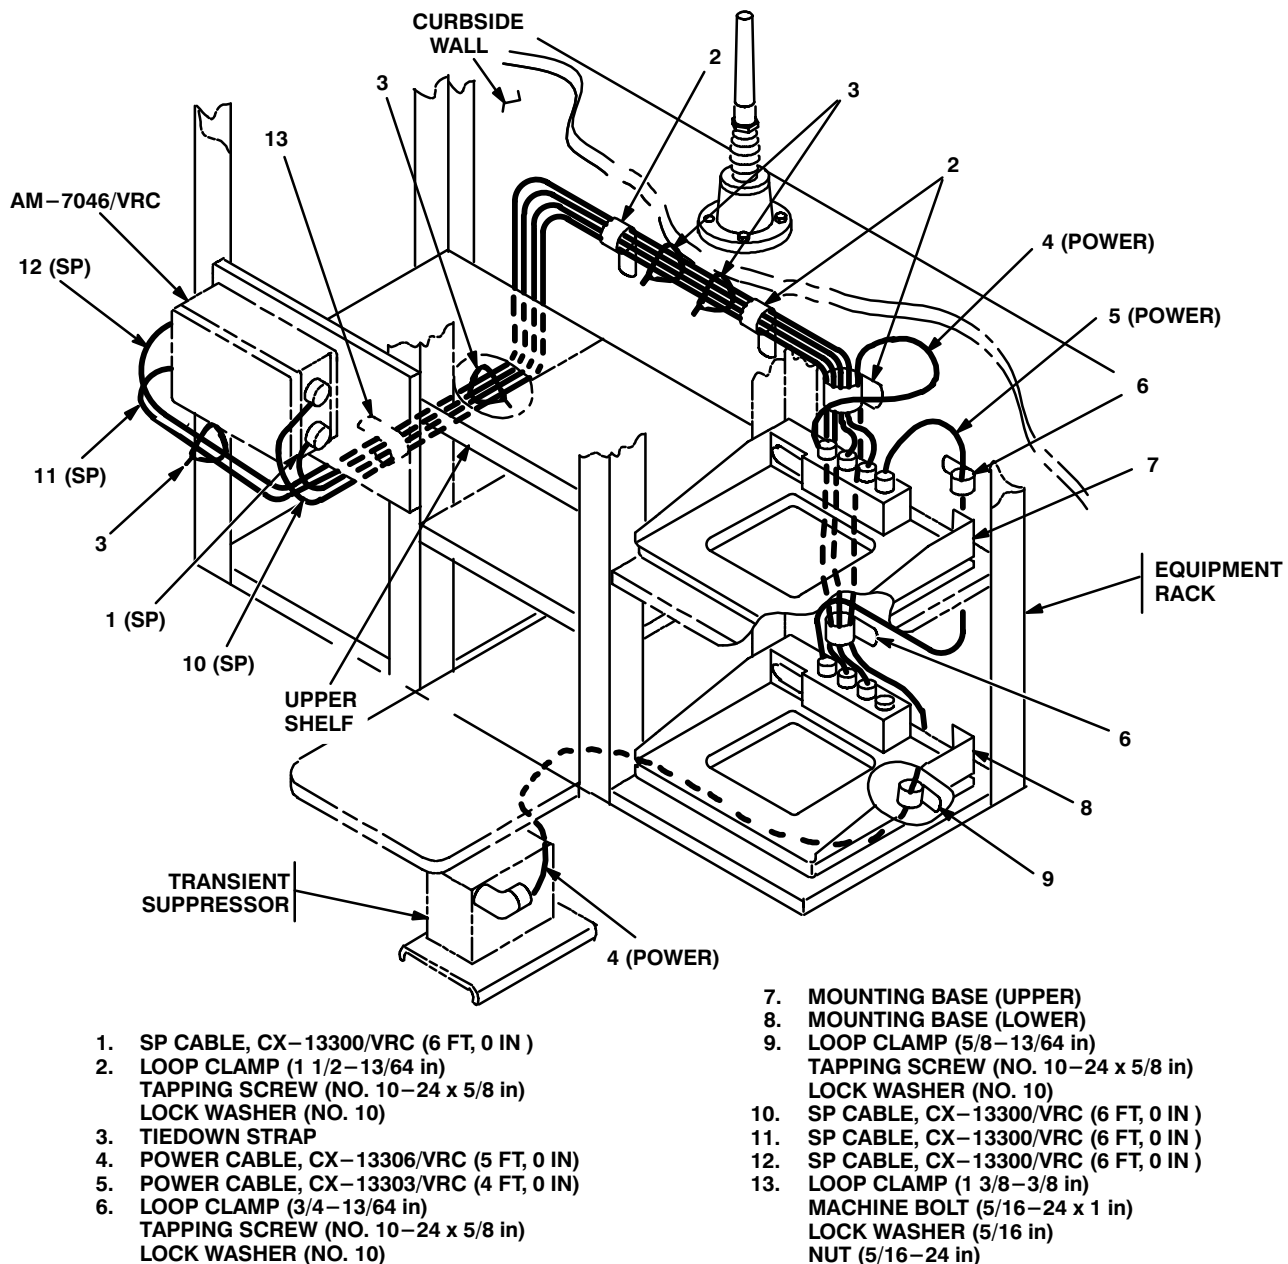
(3). Cable Installation: SP and Power Cabling
